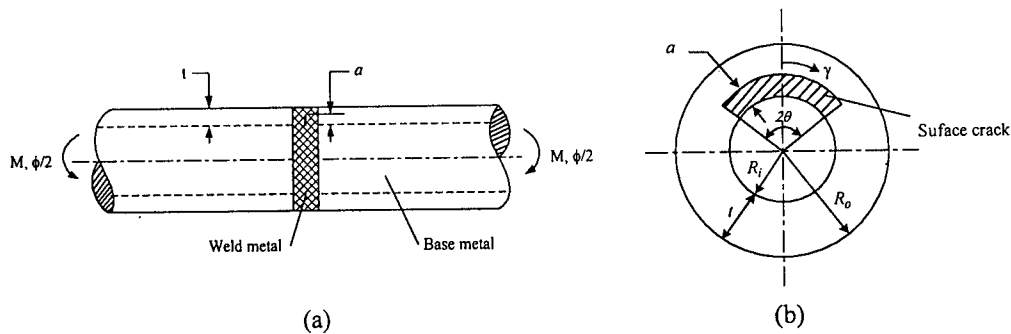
Circumferential surface-cracked pipe welded joint under pure bending moment
